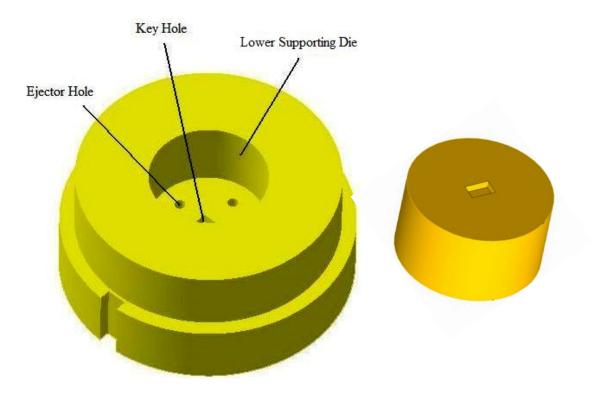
3D Model of Lower Die and Lower Supporting Die
